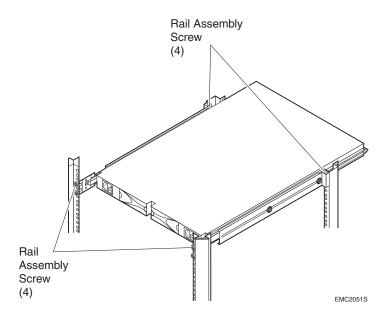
Tightening the Front and Rear Rail Assembly Screws
